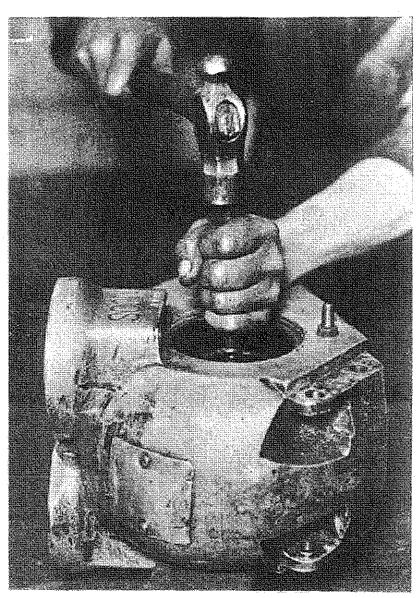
REMOVING RIGHT-HAND CRANK.
